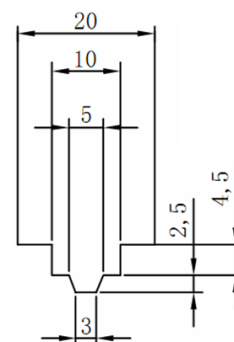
The FSW-tool geometry and dimension (Unit: mm).
